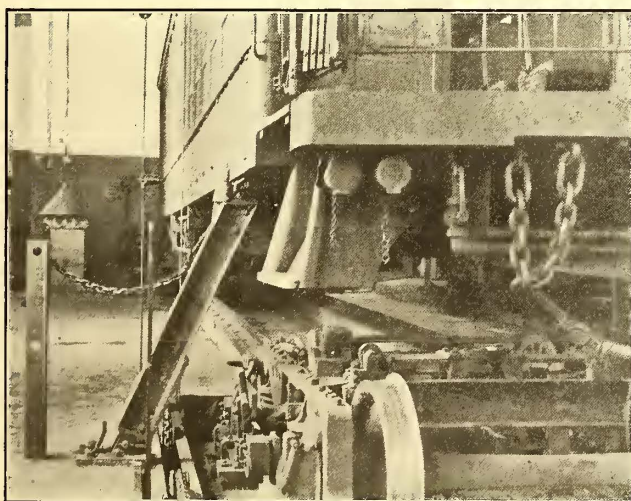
STEEL SUPPORTS HOLDING UP CAR AS TRUCK IS LOWERED
